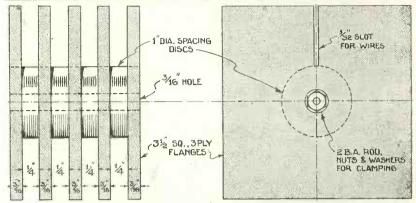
Coil for "whistle-killer." The flanges are of ordinary three-ply and the "cores" of broom-handle or ebonite rod. Remember the saw-cuts in the flanges to let wire through from one section to the next. Assemble on a length of 2B.A. screwed rod, and wind 550 turns of No. 30 going d.s.c. in each slot
